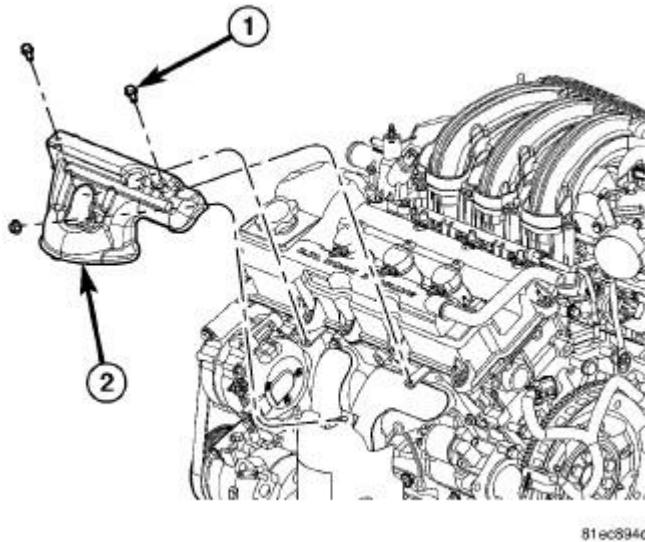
FRONT MANIVERTER HEAT SHIELD
